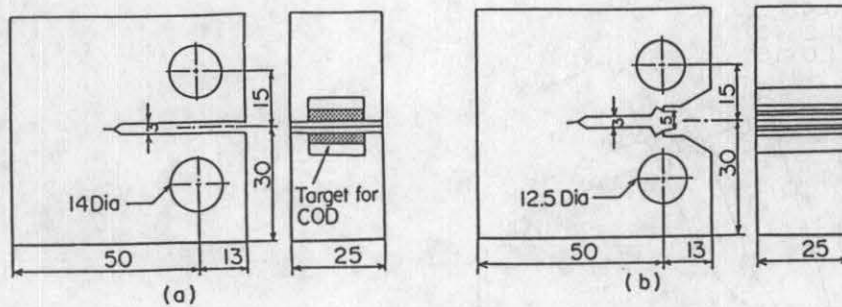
Configurations of the compact tension specimens for dynamic test (a) and static test (b), dimensions in mm.
